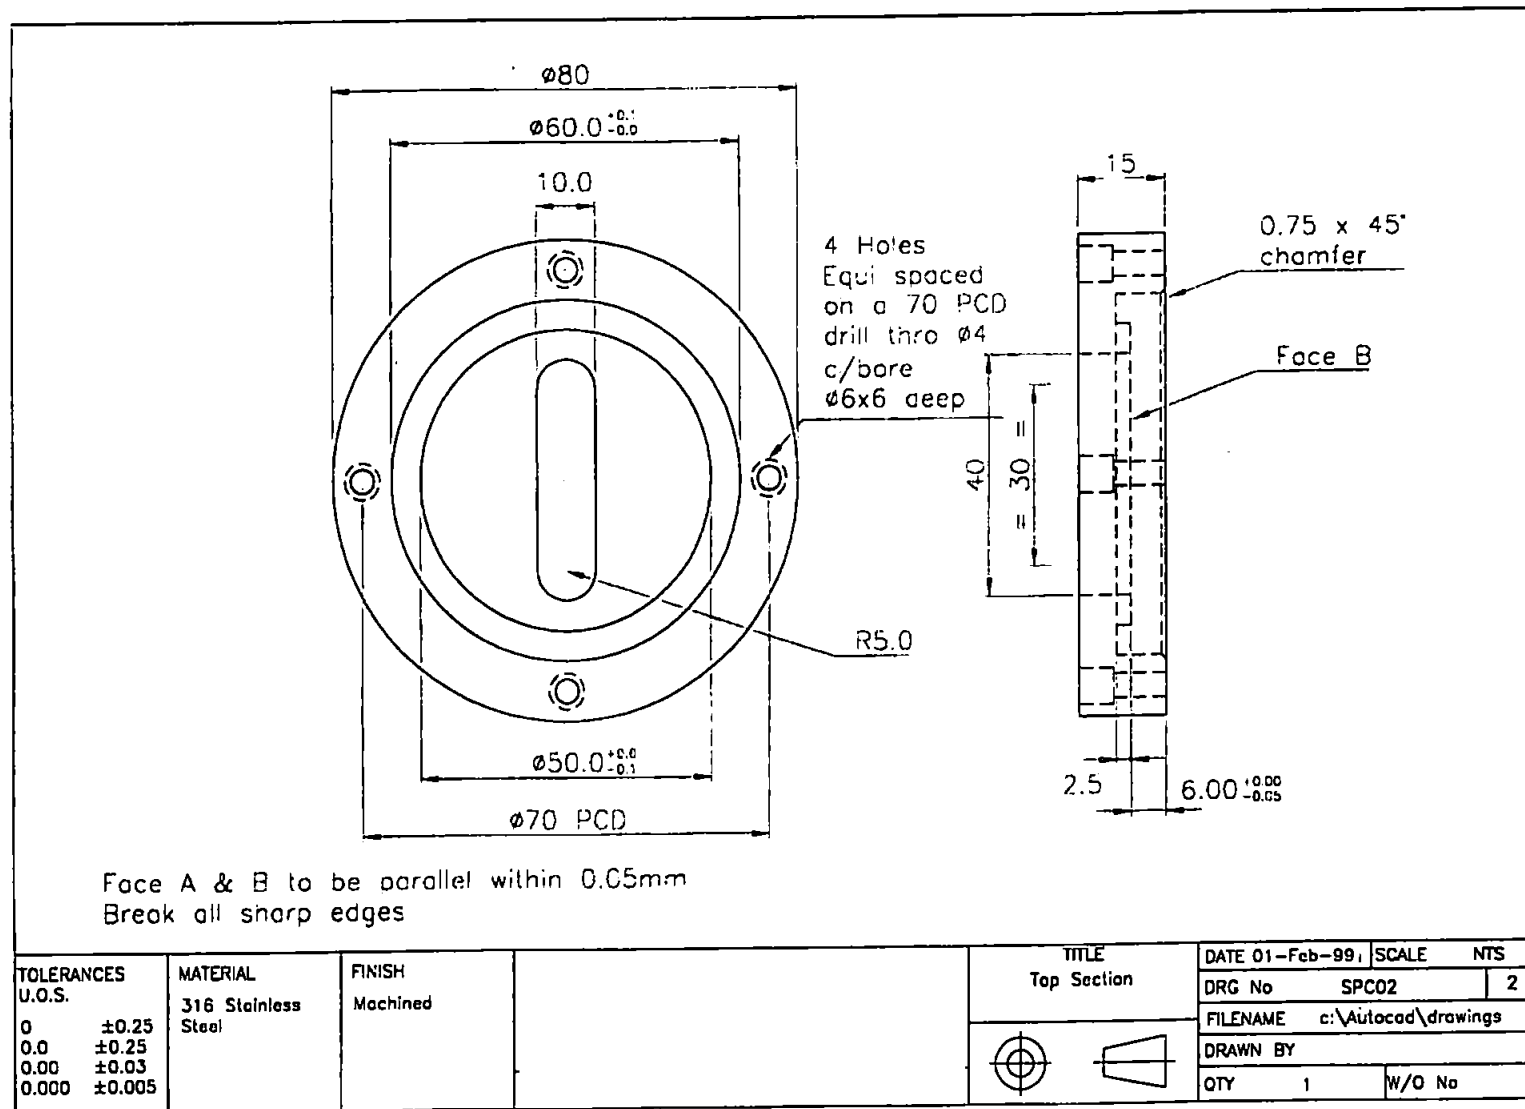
Technical drawing of final laminar flow cell, top section.
